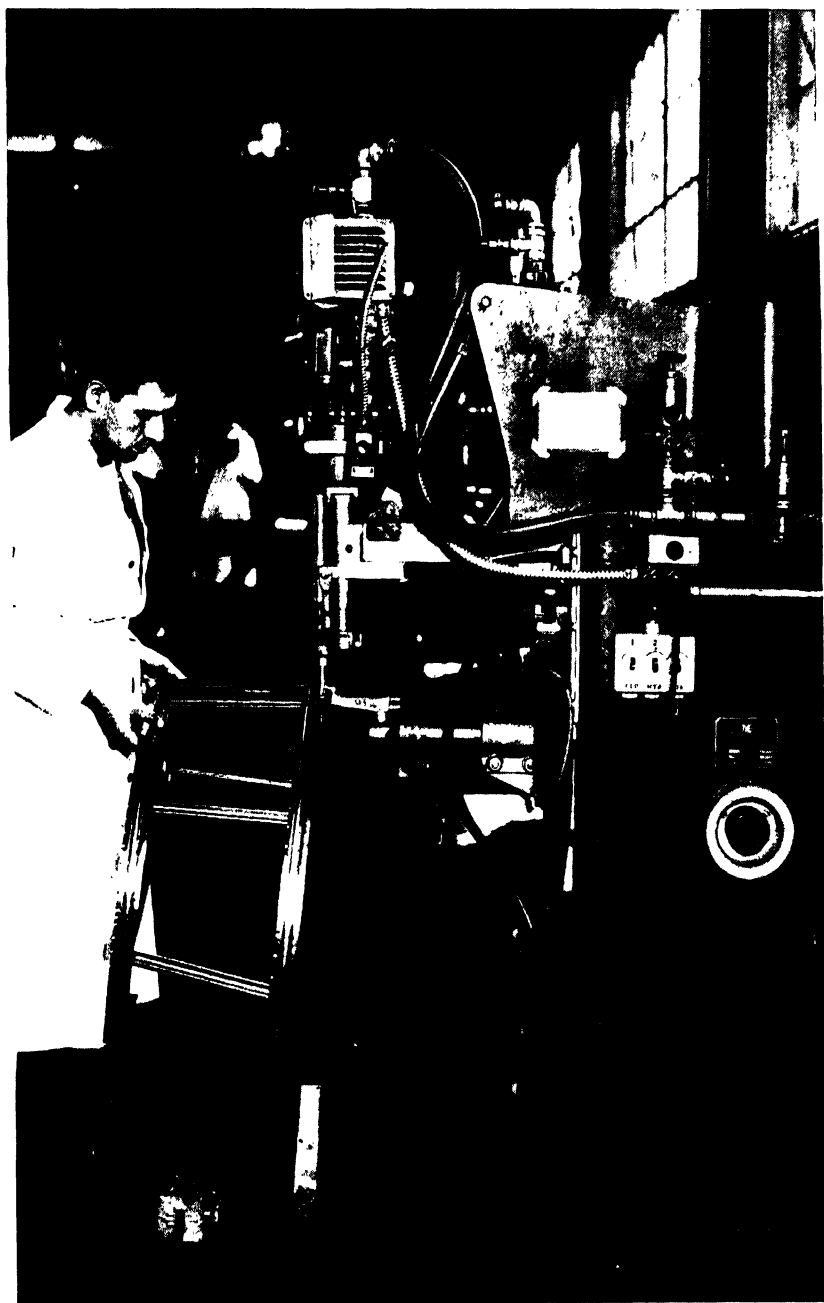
PLATE IX.—Spot-welding airplane parts. Assembly spot welding of airplane cowl sections of Stainless steel. (*Courtesy of Progressive Welder Company.*)
